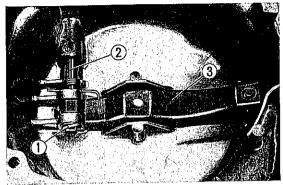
① Cotter pin ③ Clutch adjusting lever ② Clutch lever
